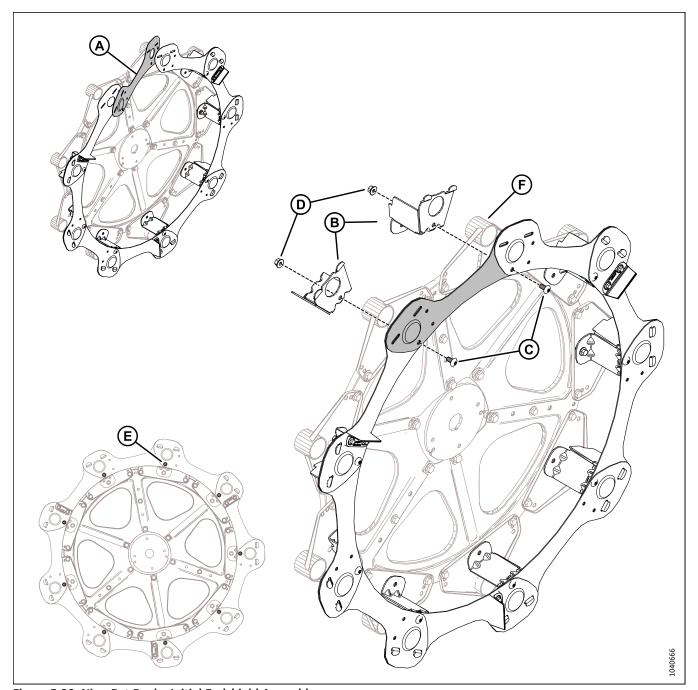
Nine-Bat Reel - Initial Endshield Assembly
